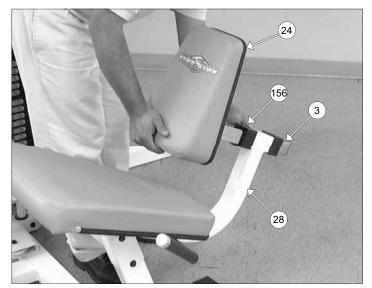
Insert the assembled Back Pad Adjustable Tube (#3) to the Leg Extension Seat Frame (#28).
